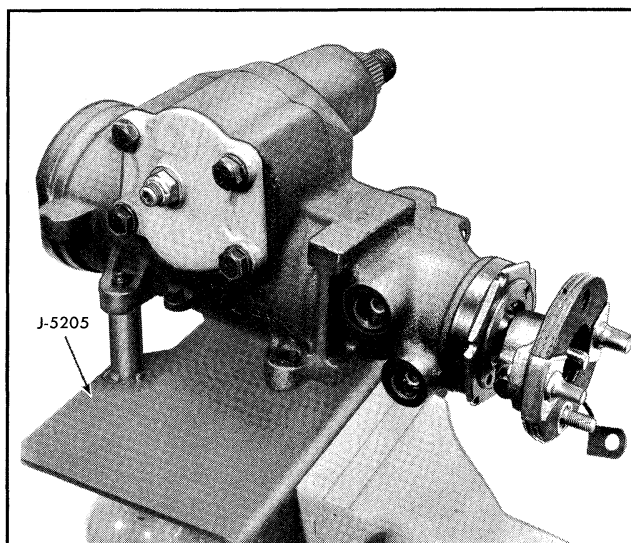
A-6 Steering Gear Mounted on Tool J-5205
